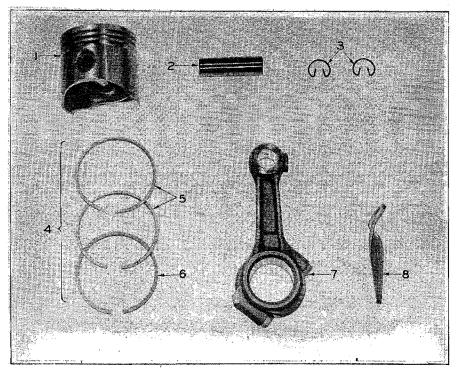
PISTON AND CONNECTING ROD GROUP
